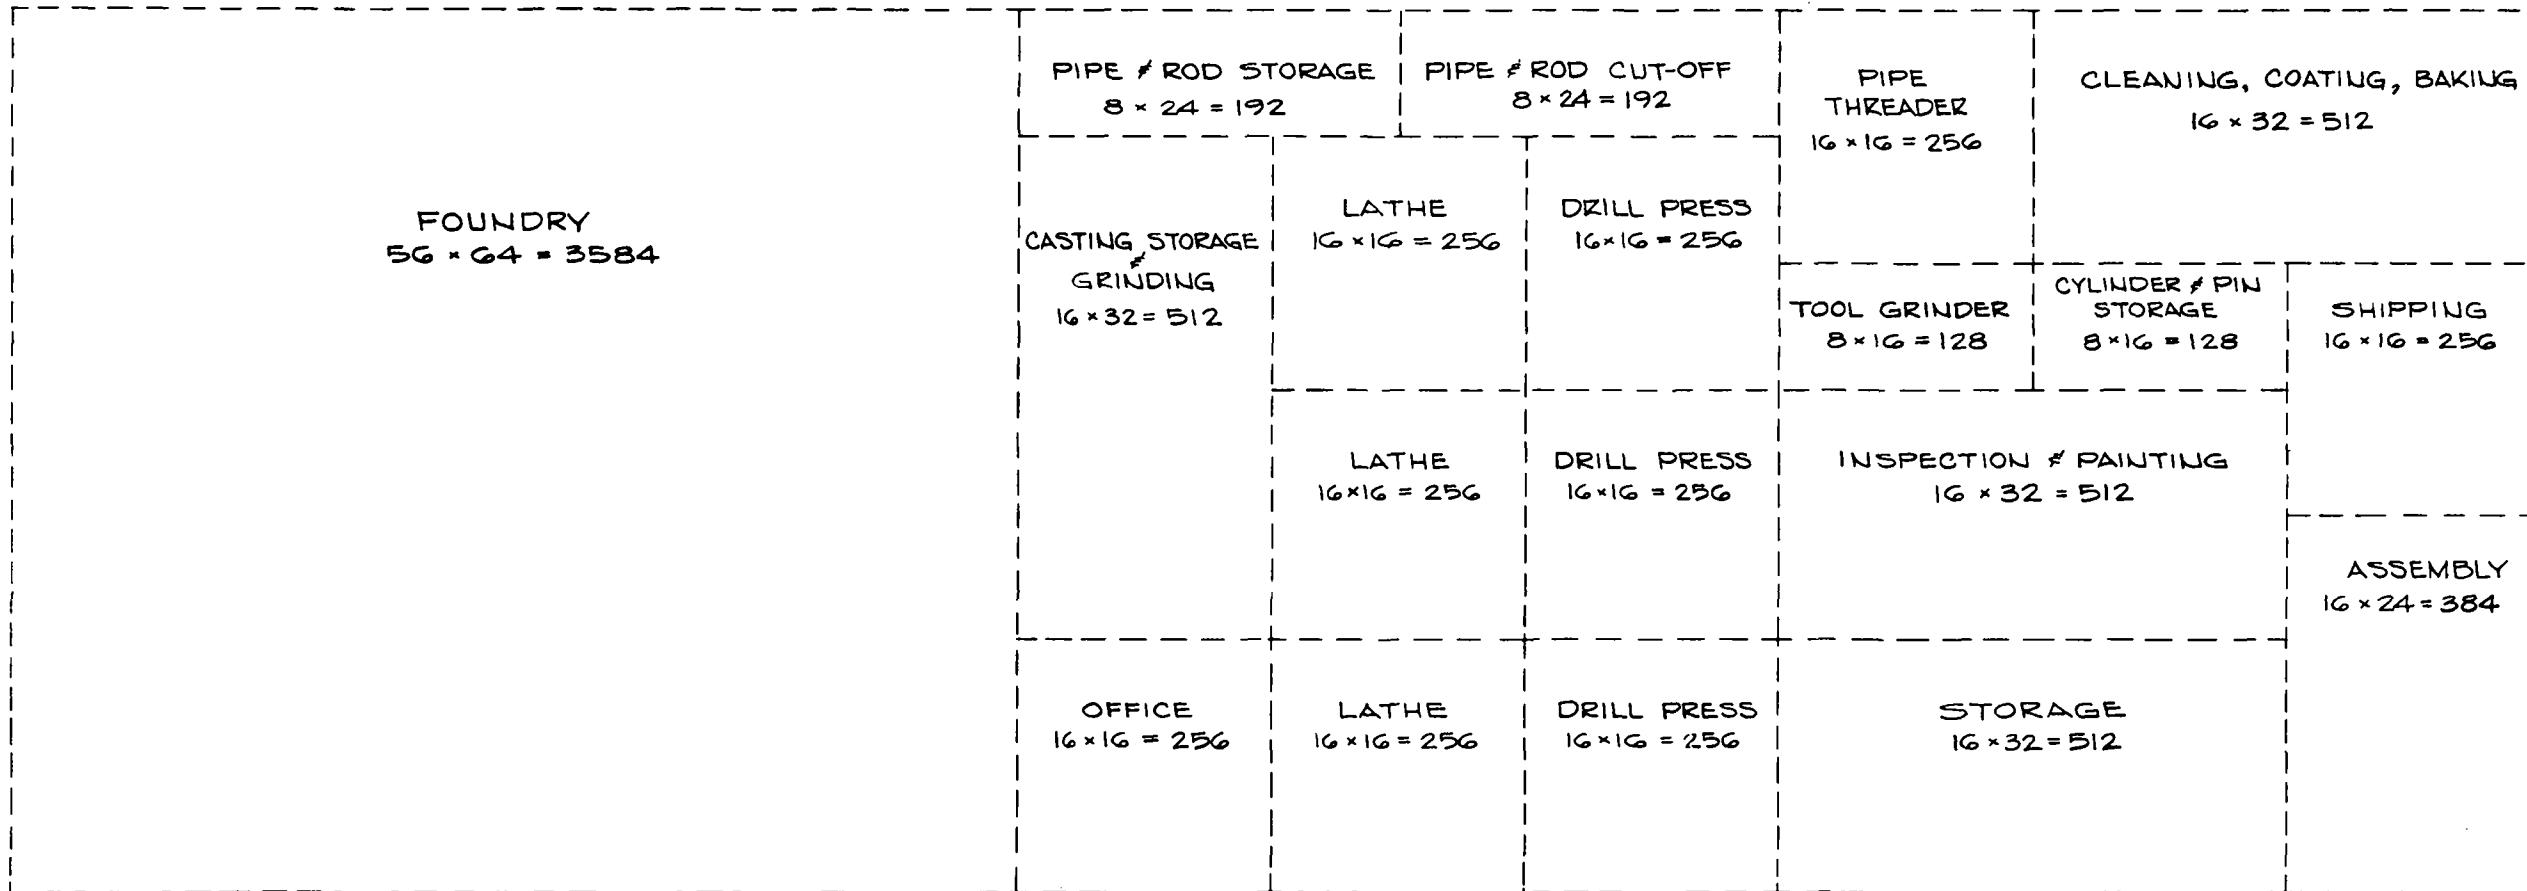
LAYOUT OF POSSIBLE FOUNDRY AND MACHINE SHOP TO PRODUCE THE PROPOSED PUMP
